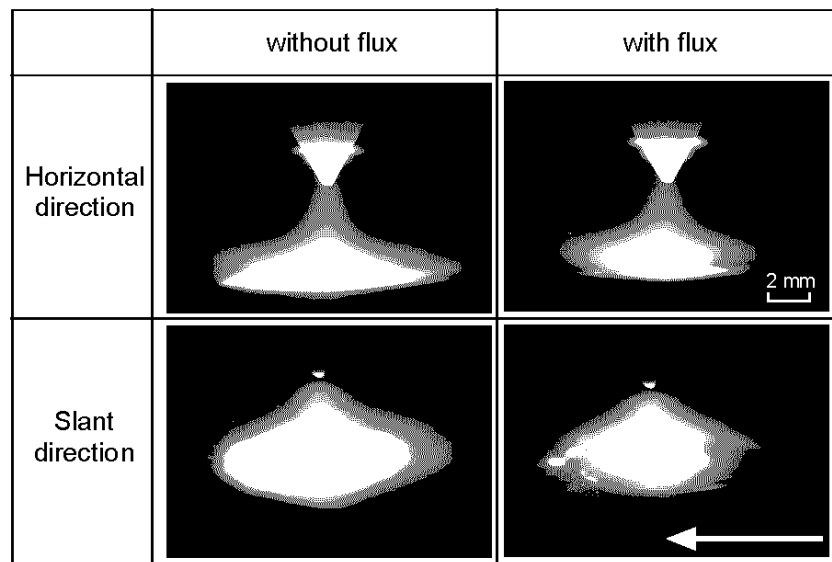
Characteristic appearances of the arc in helium GTA welding with and without flux under condition of 200 A in welding current.
